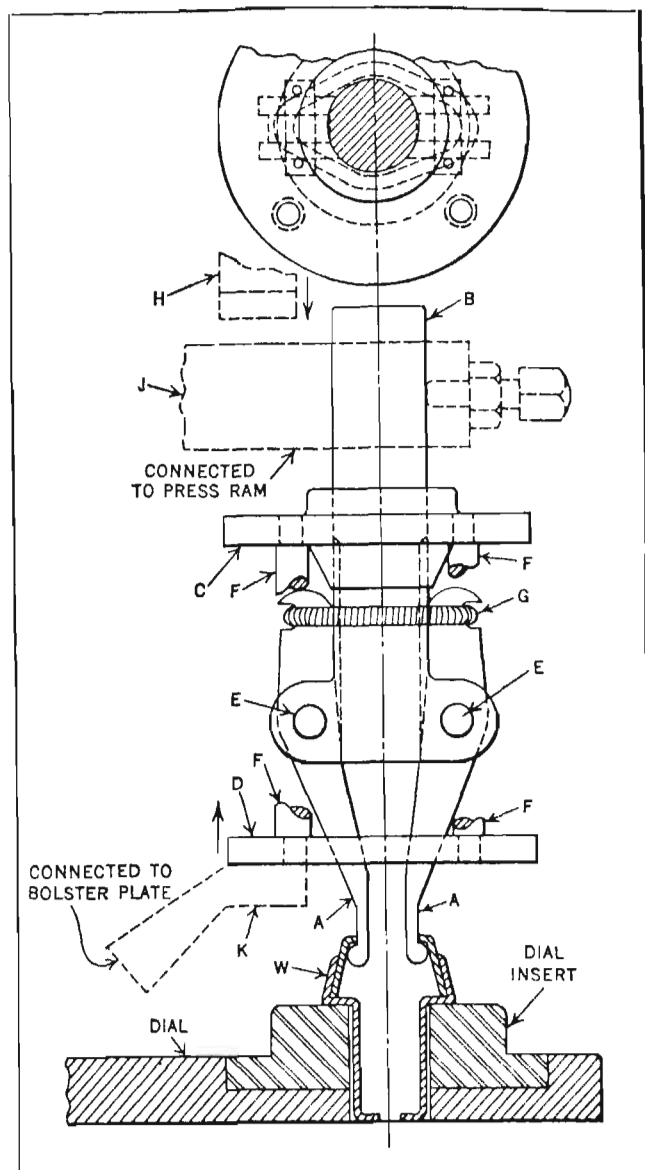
Device for Ejecting Assembled Part from Dial of Inclined Press
